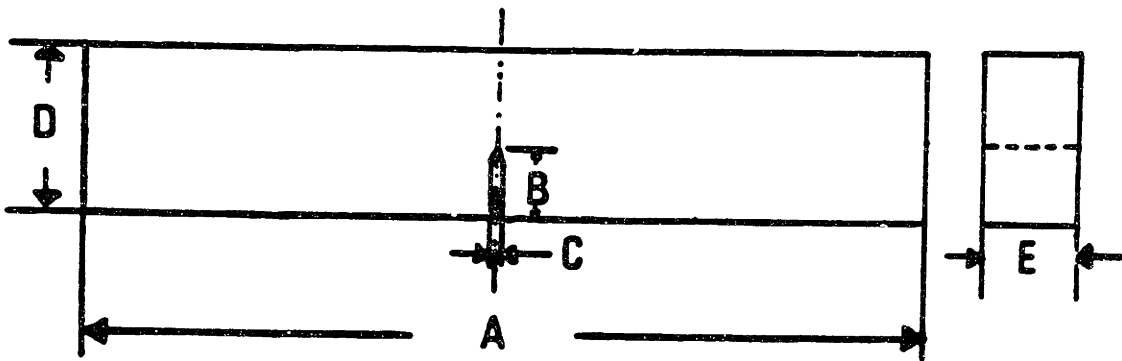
Three-point bend fracture toughness specimen for J-integral testing. Dimensions in mm.
